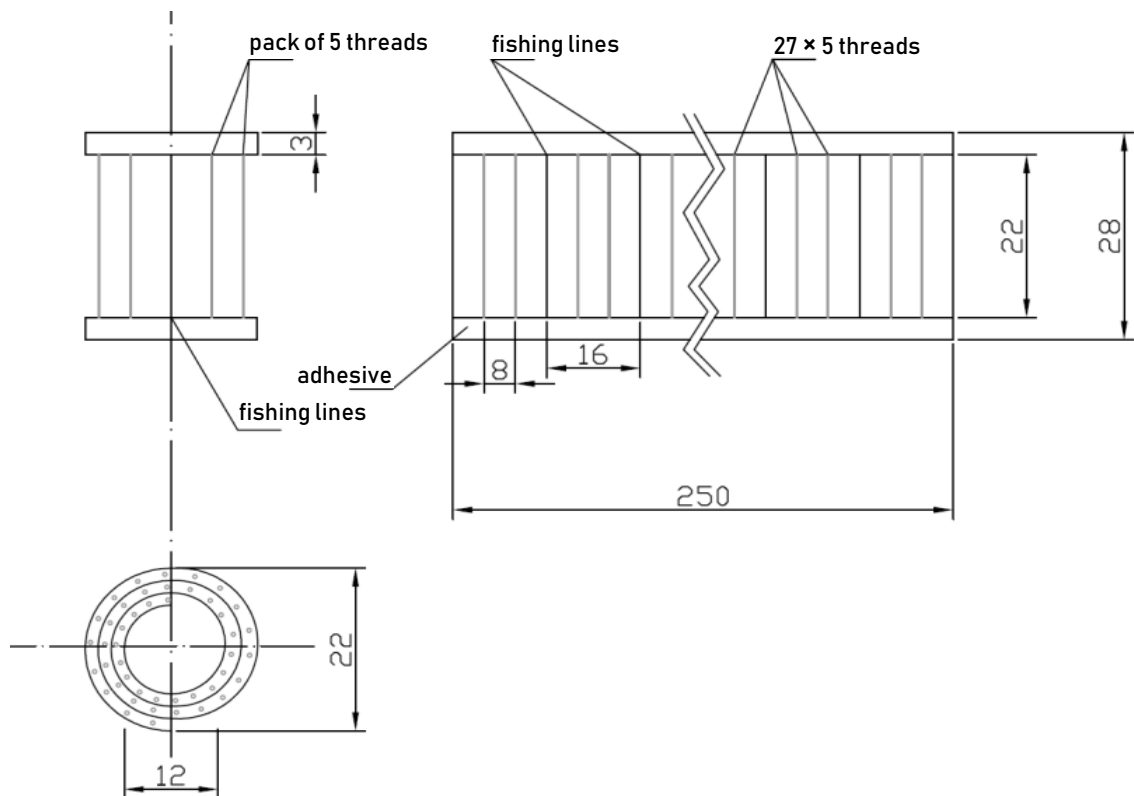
Technical drawing of multi-cluster linear arrangement. Dimensions in mm.
